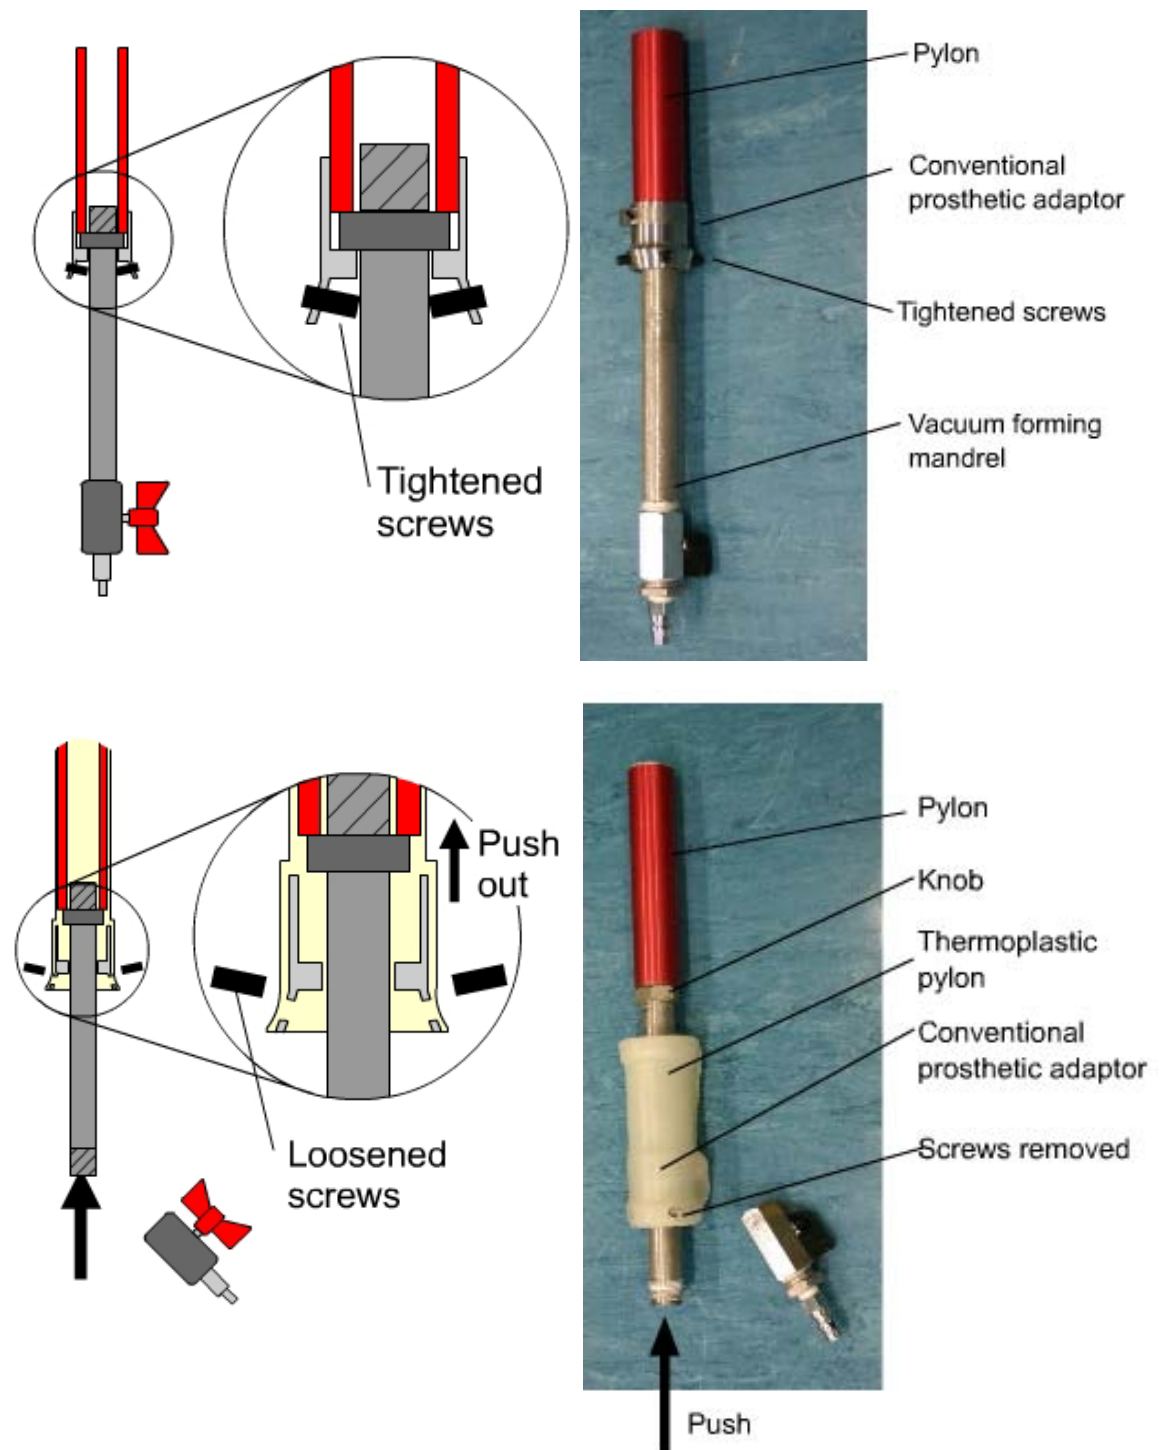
Pylon is pushed away from monolimb by hitting the end of vacuum forming mandrel.
